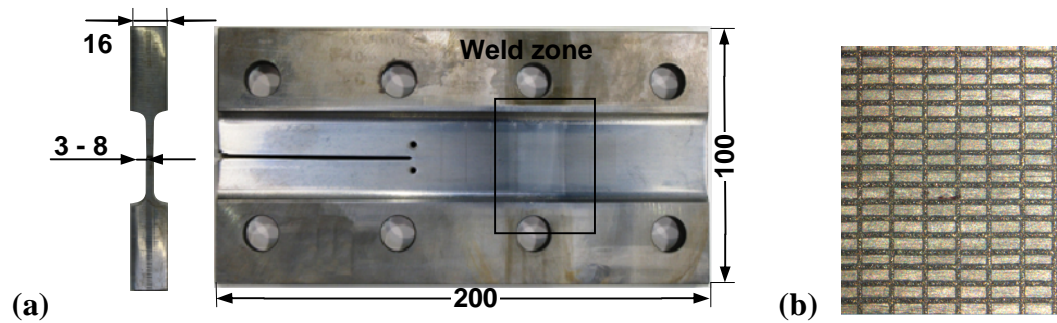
(a)MDCB specimen (dimensions are in mm), and (b) magnified view of the grating (1 mm × 0.5 mm).
